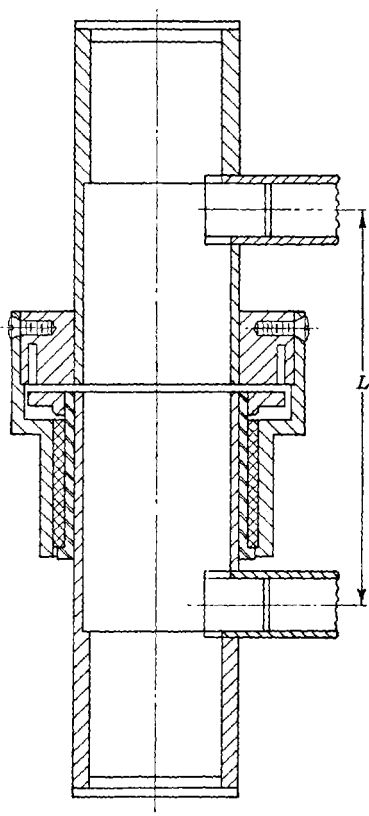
Assembly of rotary joint and E_o -transformers.
